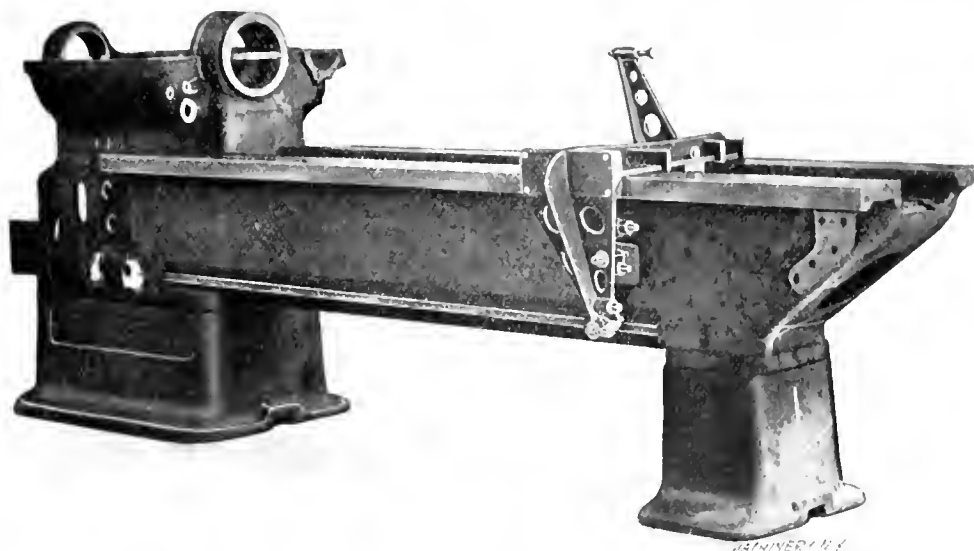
A One-piece Turret Lathe Head-stock and Bed, with the Gage by which the Planing is Tested; the Center in the Vertical Arm must coincide with the Center Line of the Spindle.
